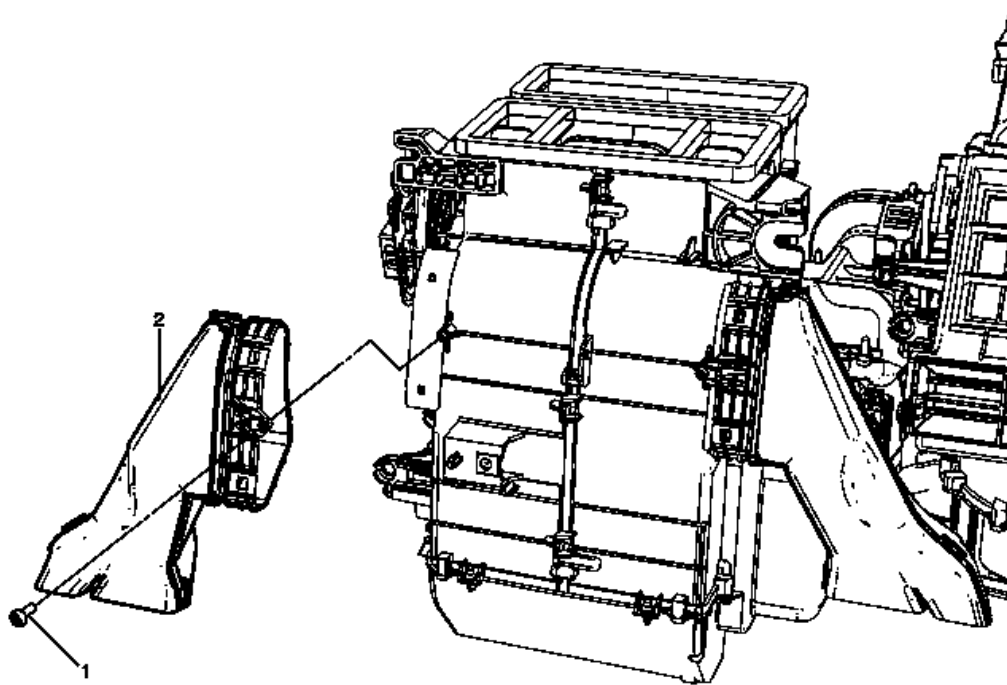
Floor Air Outlet Duct - Left Side (Left Hand Drive)
